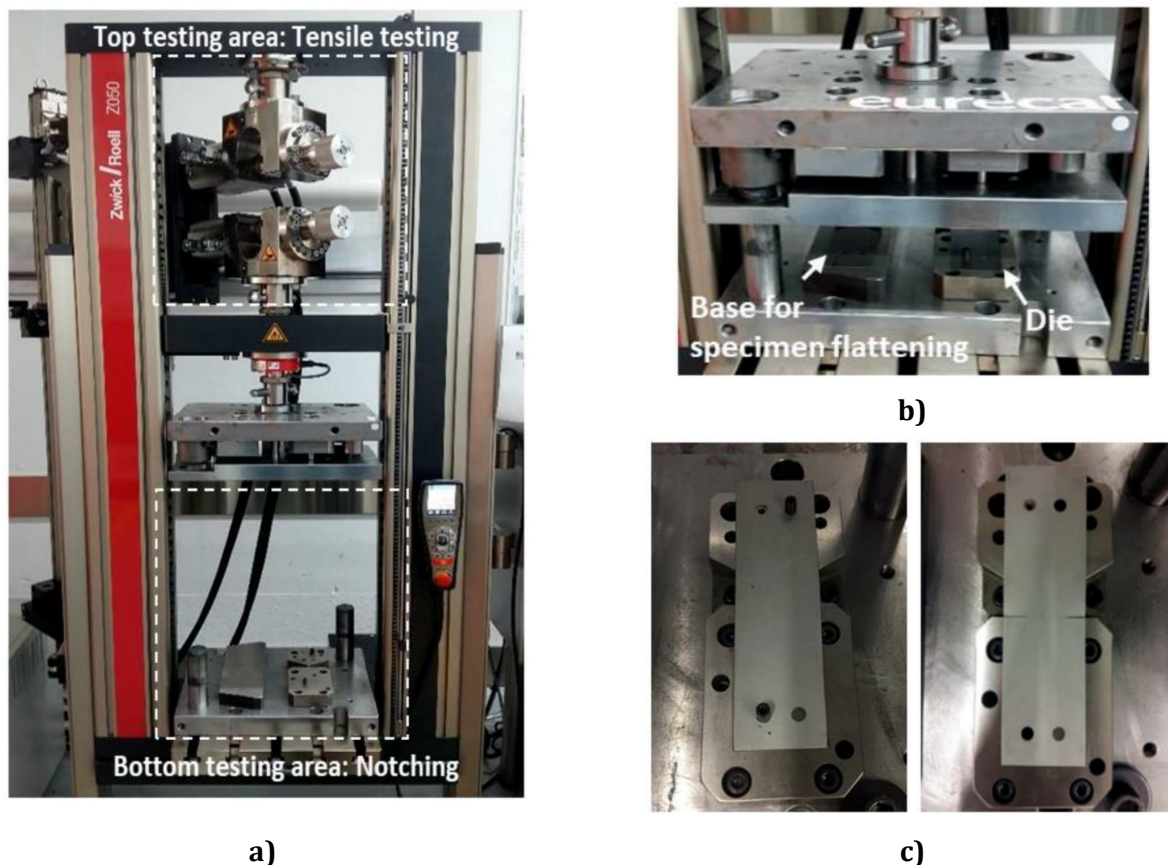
Images of the experimental setup for the notching process. a) Setup of the tool in the testing machine. b) Detail of the cutting tool. c) Specimen before (left) and after (right) the notching process [60]
